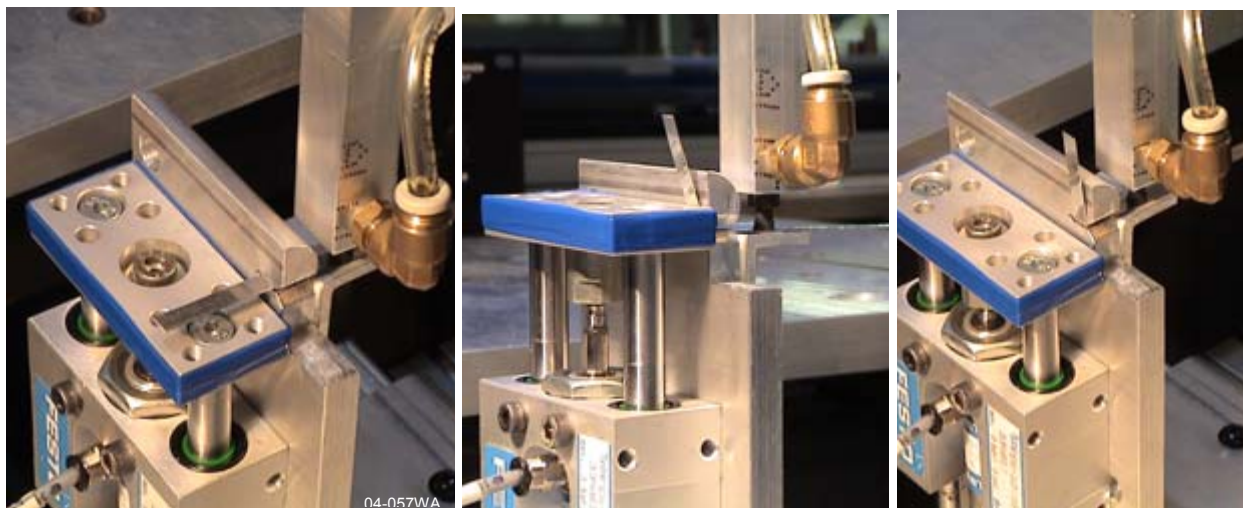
A robot inserts a bus bar in the bending tool (left), an air cylinder extends to bend the ribbon (center), and the cylinder retracts (right).
